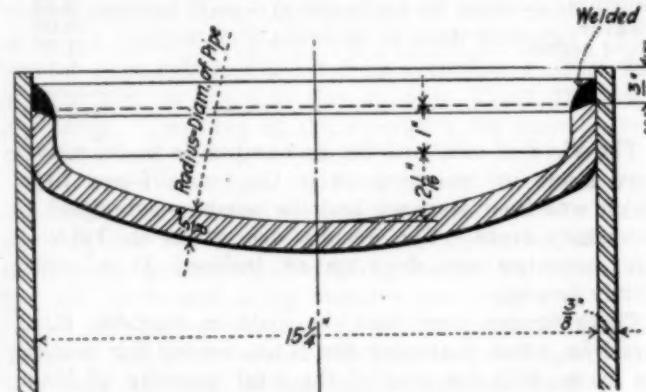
SHAPE AND DIMENSIONS OF SPECIMEN CONTAINER
